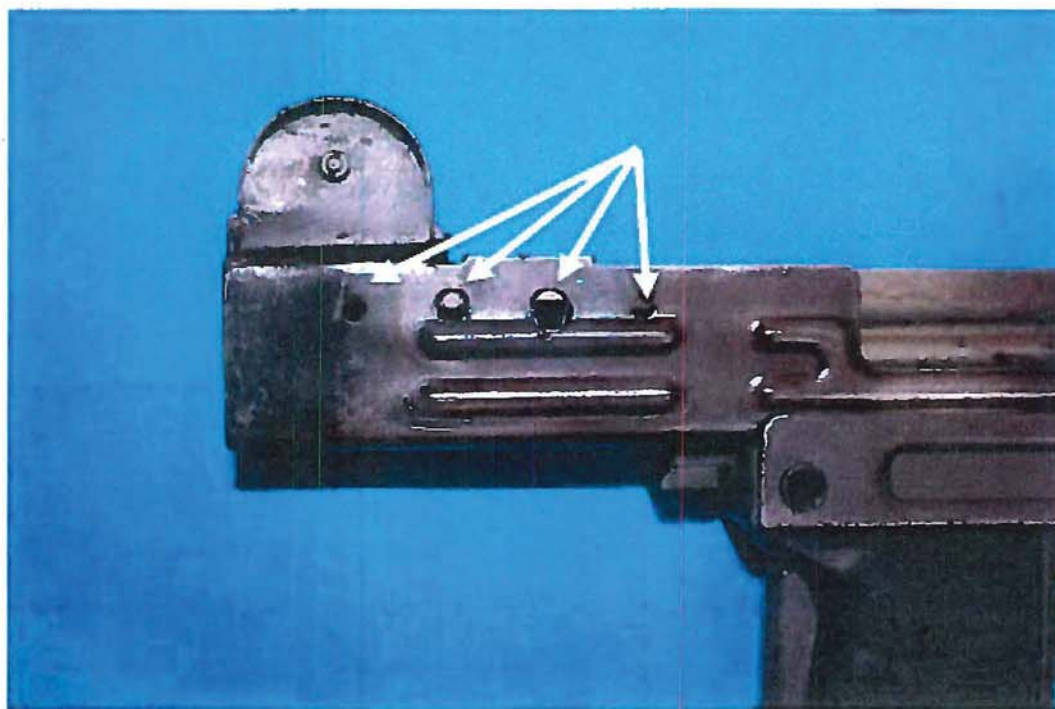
, Inside View of Holes on Right Side to Install Machinegun Blocking Bar
